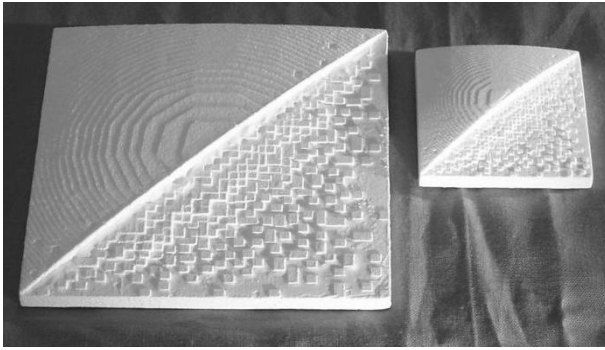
Alumina ceramic tiles produced by Specific Surfaces Inc using 3D printing.
